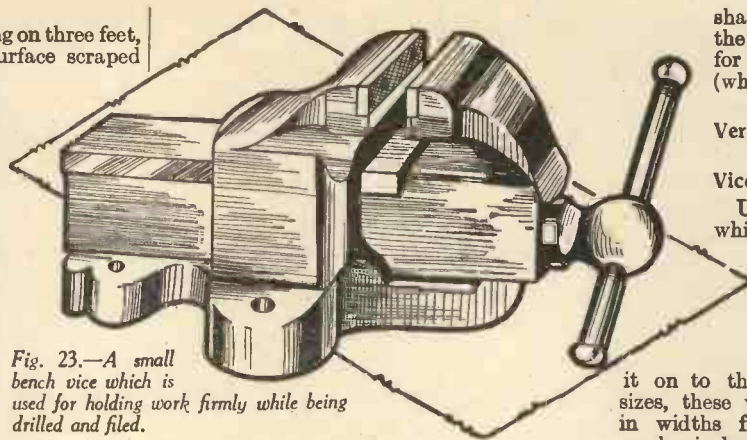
A small bench vice which is used for holding work firmly while being drilled and filed.
